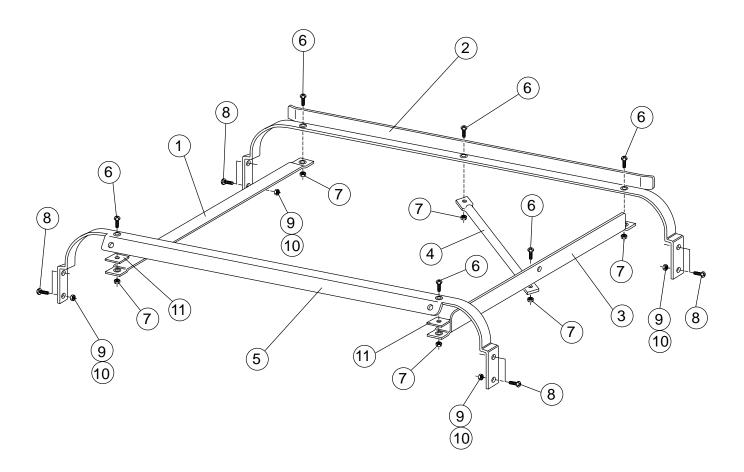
MH-60/6N/6L Track Assembly (Corner configuration shown)
